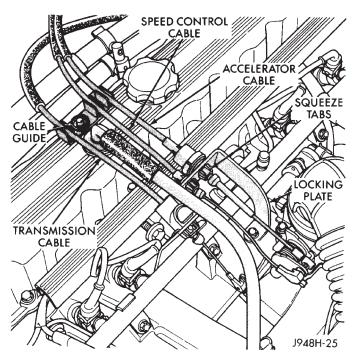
Cable Guide/Locking Plate—4.0L Engine
